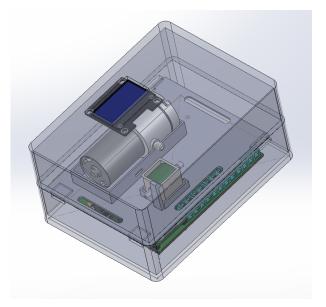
3-D Encasement Assembly. It includes parts downloaded online: pump, solenoid, and display[26][27]
